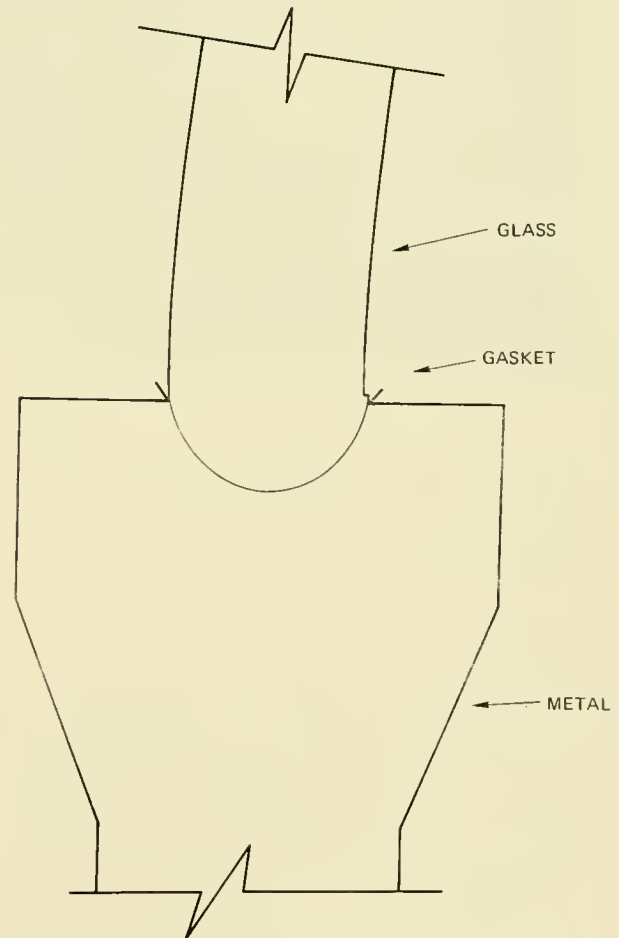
Cross section of glass to metal joint. [From Ref. (19)]
